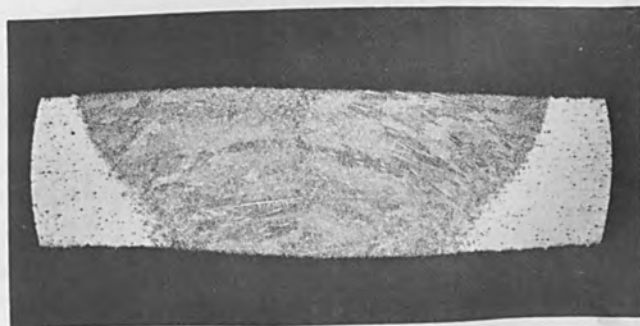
Rene 41 sheet - plasma E.B. weld.
